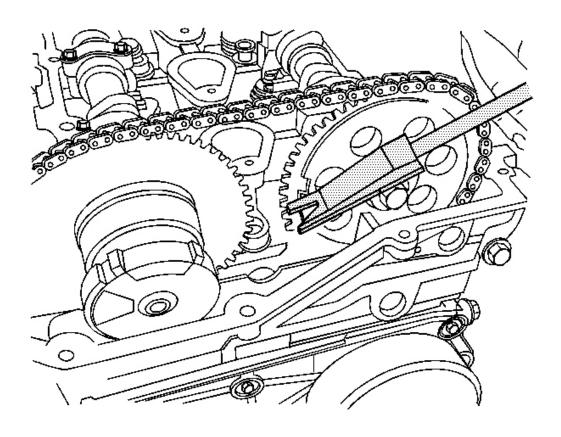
Installing Wedge Tool Handle Courtesy of GENERAL MOTORS CORP.
